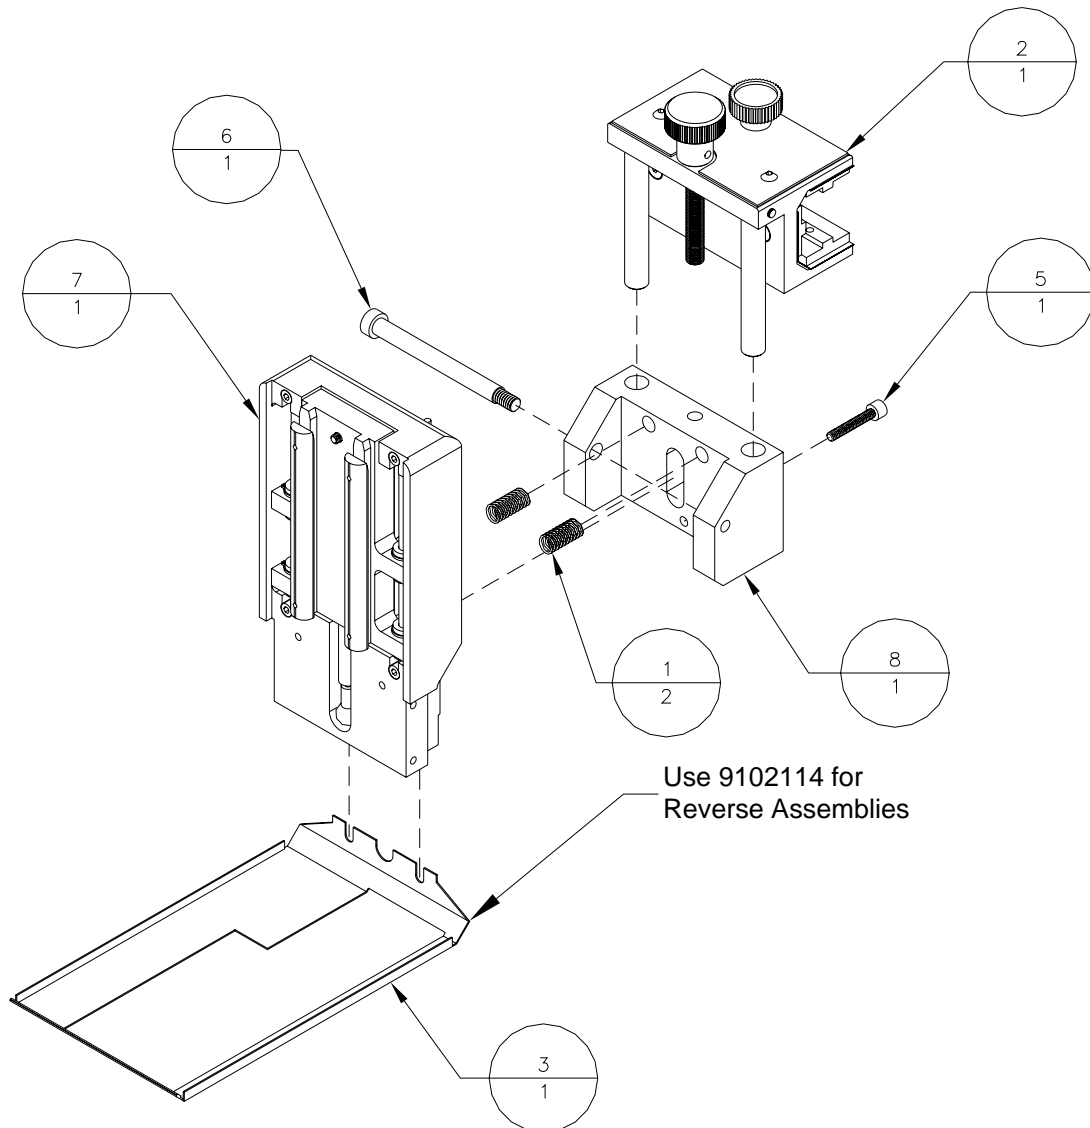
Singlehead Mount Assembly (BK79M-1)
